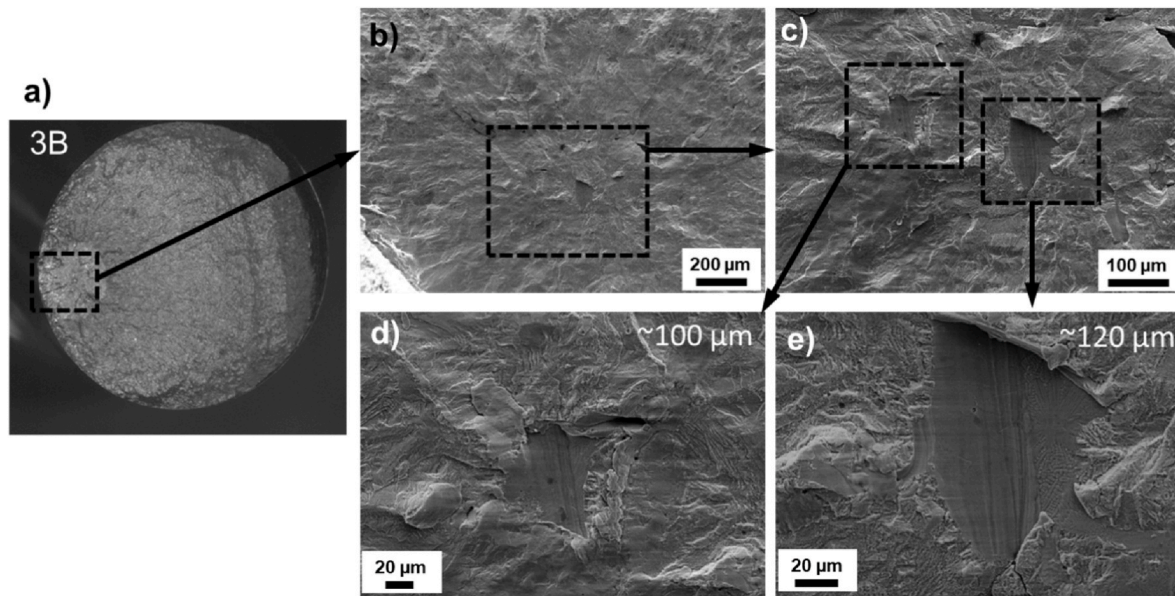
Fracture surface of specimen 3B, set B. Two defects were identified on the initiation region of the fracture surface; their sizes are indicated. The images were acquired with SOM (a) and SEM (b–e).
